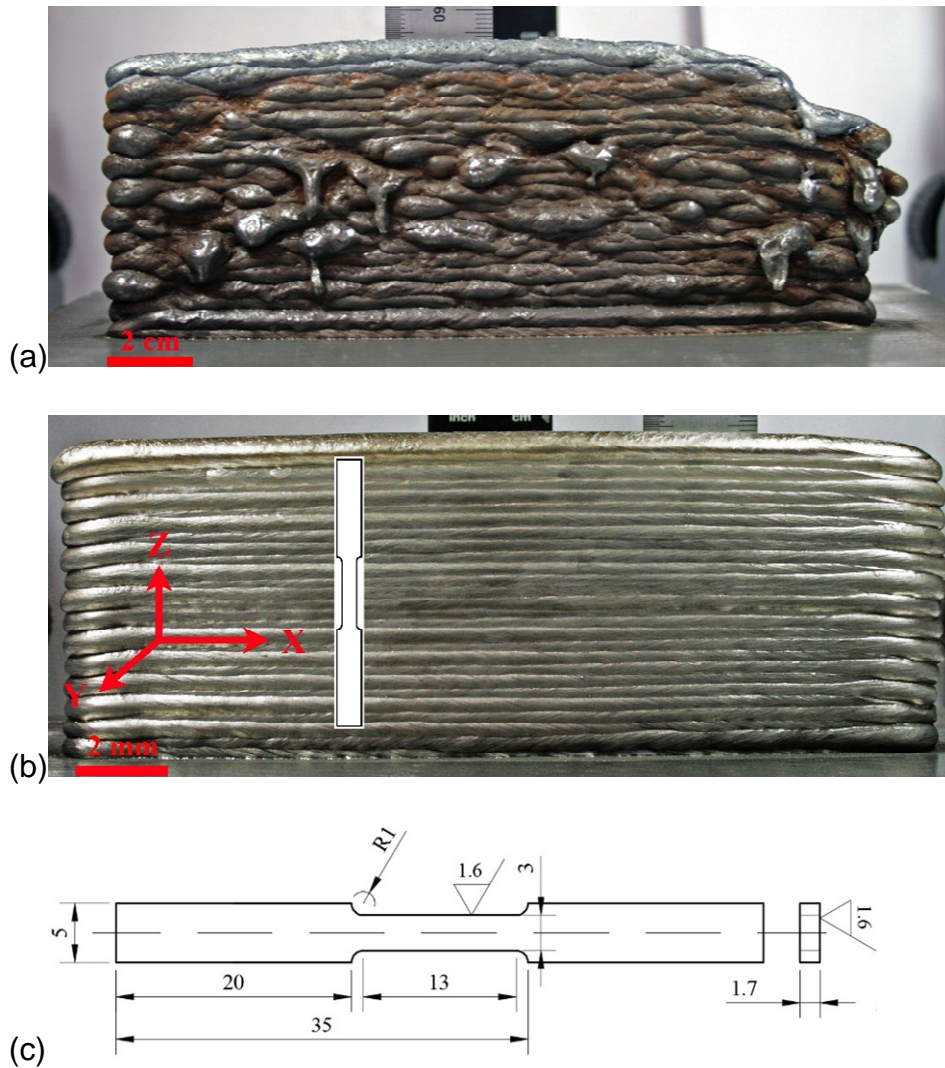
Two additional walls built for the tensile test using CMT process (a) torch shielding only (wall size: 180×68×9.8mm) (b) torch + tent shielding (wall size: 185×68×11.3mm) and (c) tensile test specimen drawing.
